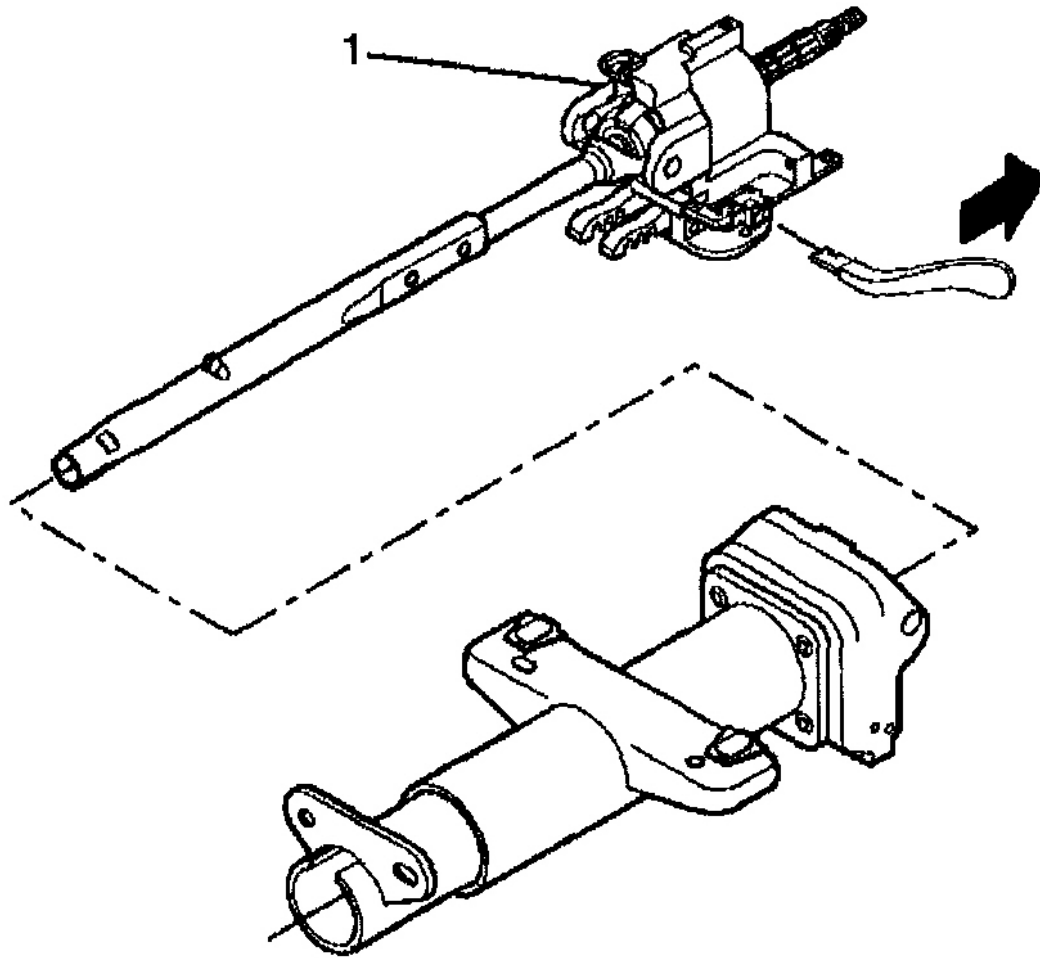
Removing Steering Column Support Assembly Pivot Pins
